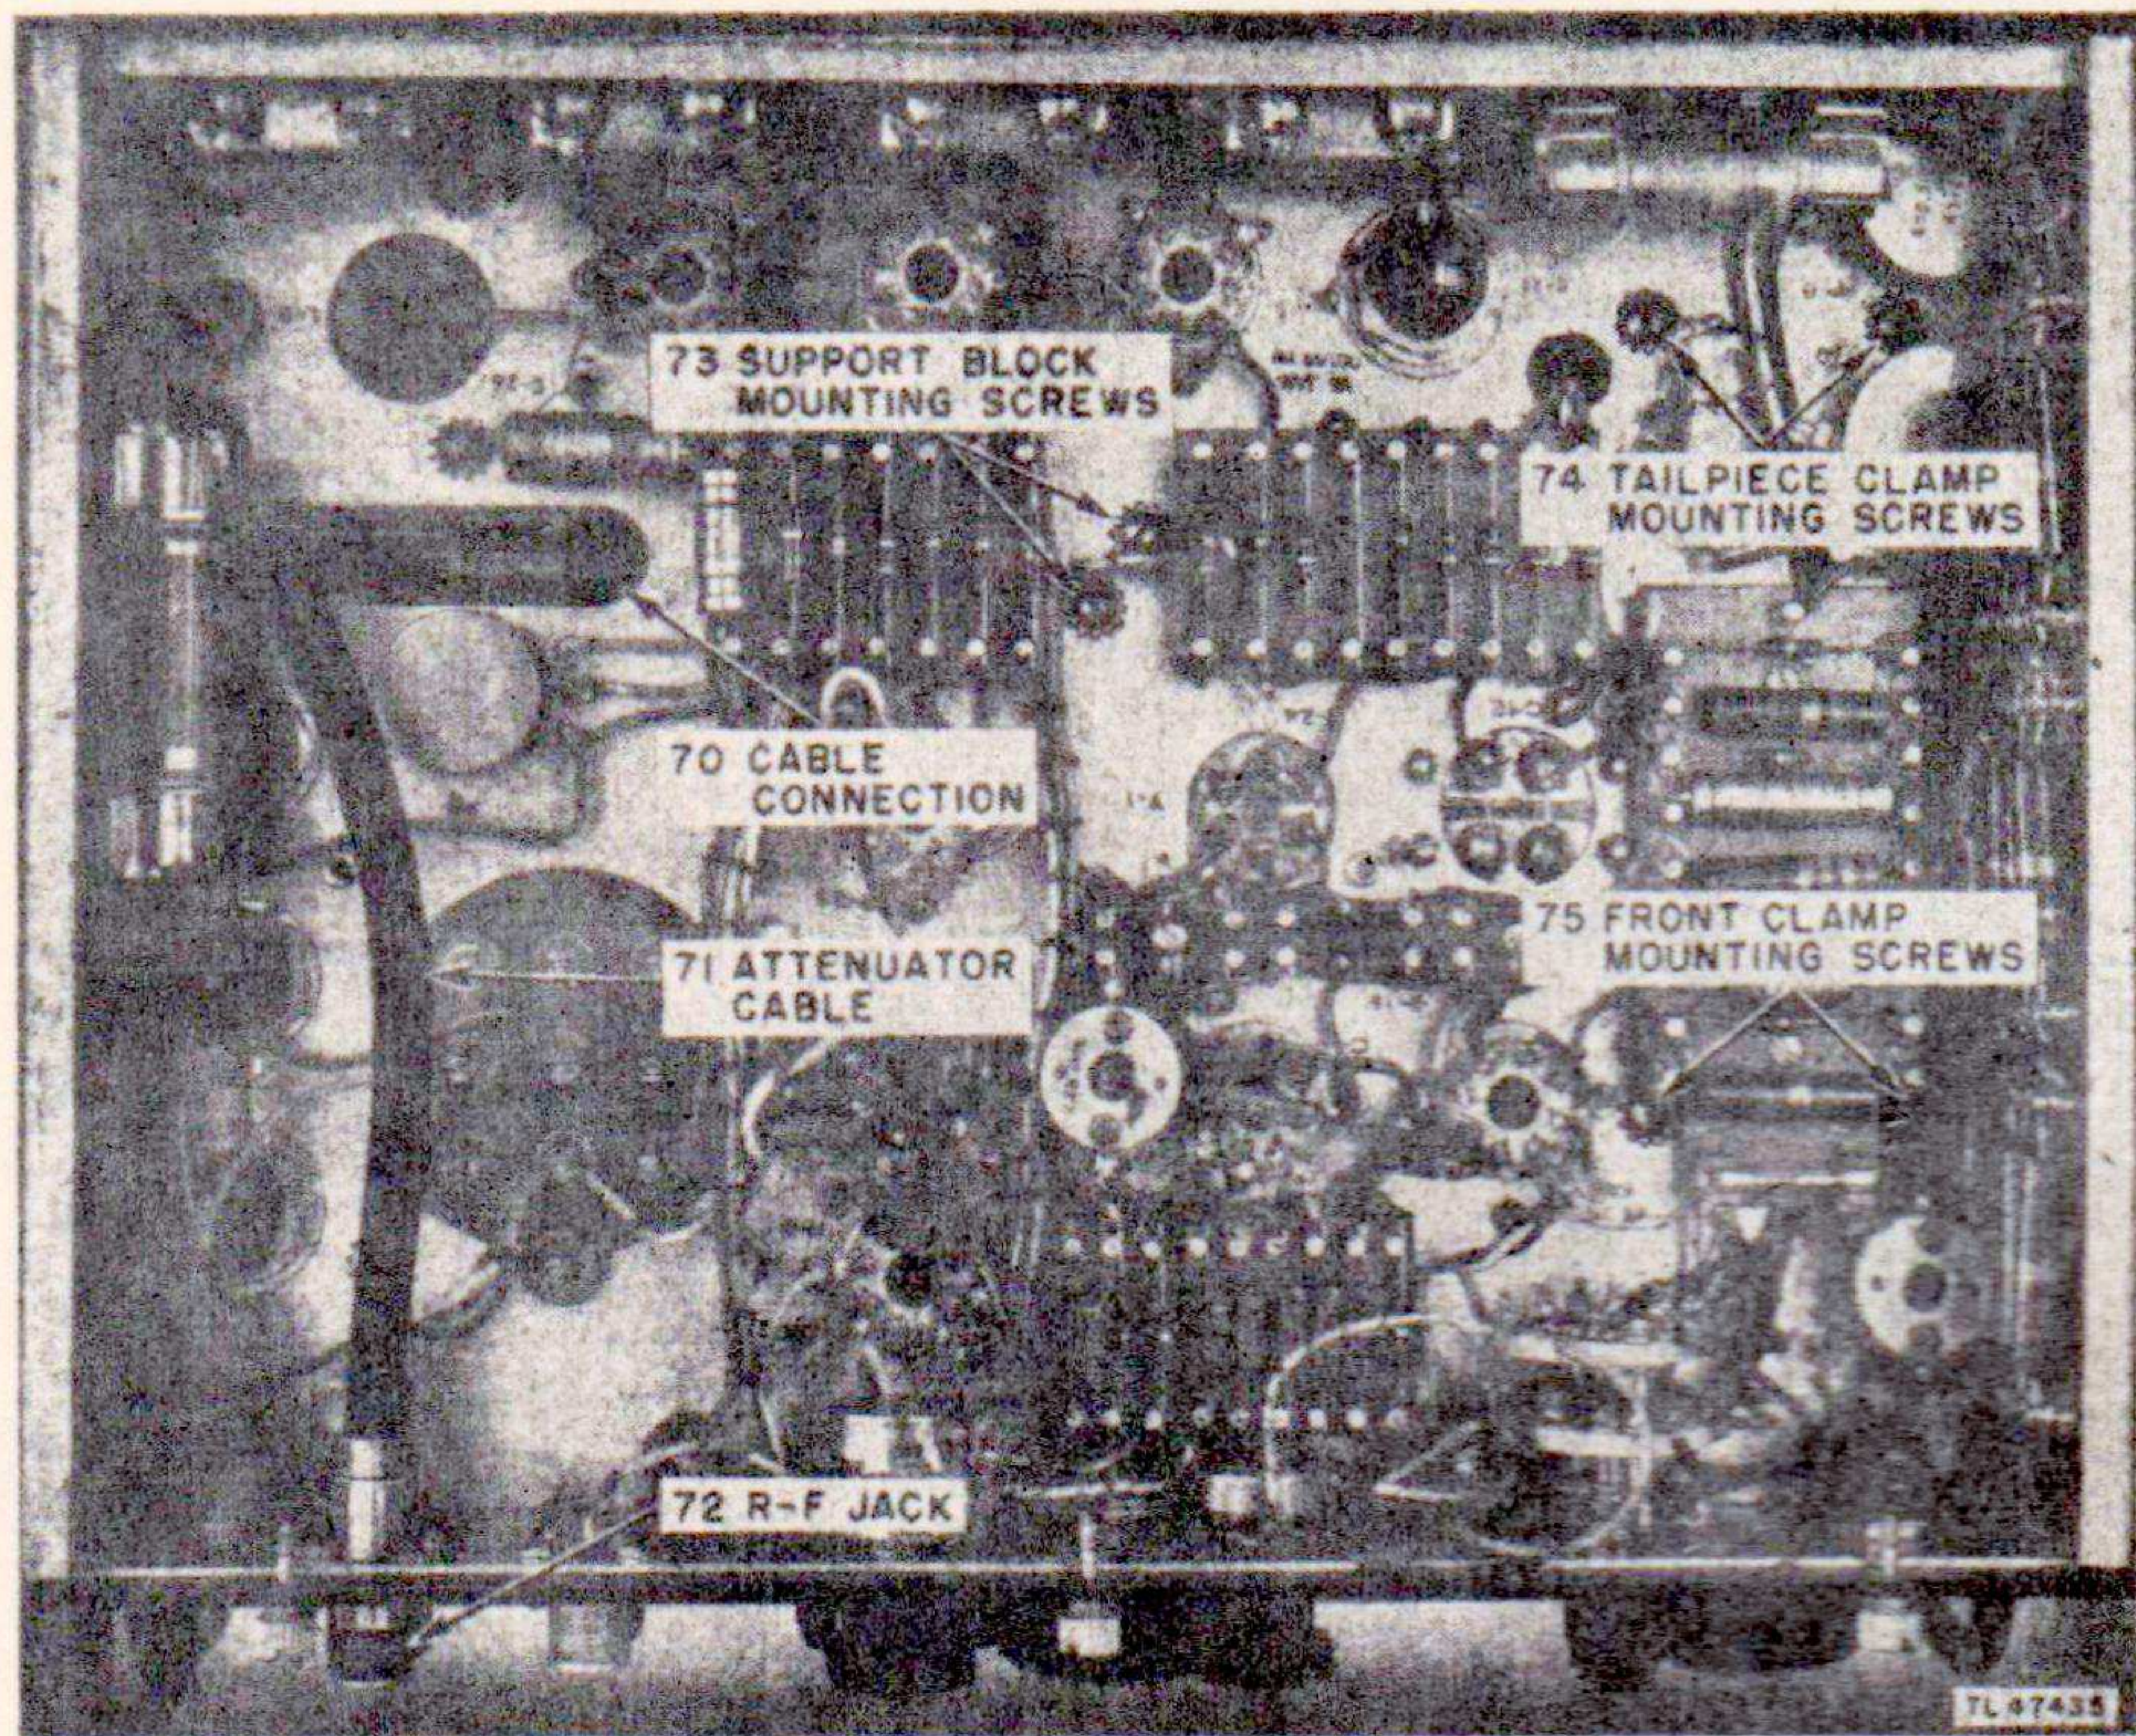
Bottom of chassis, oscillator assembly mounting screws.
